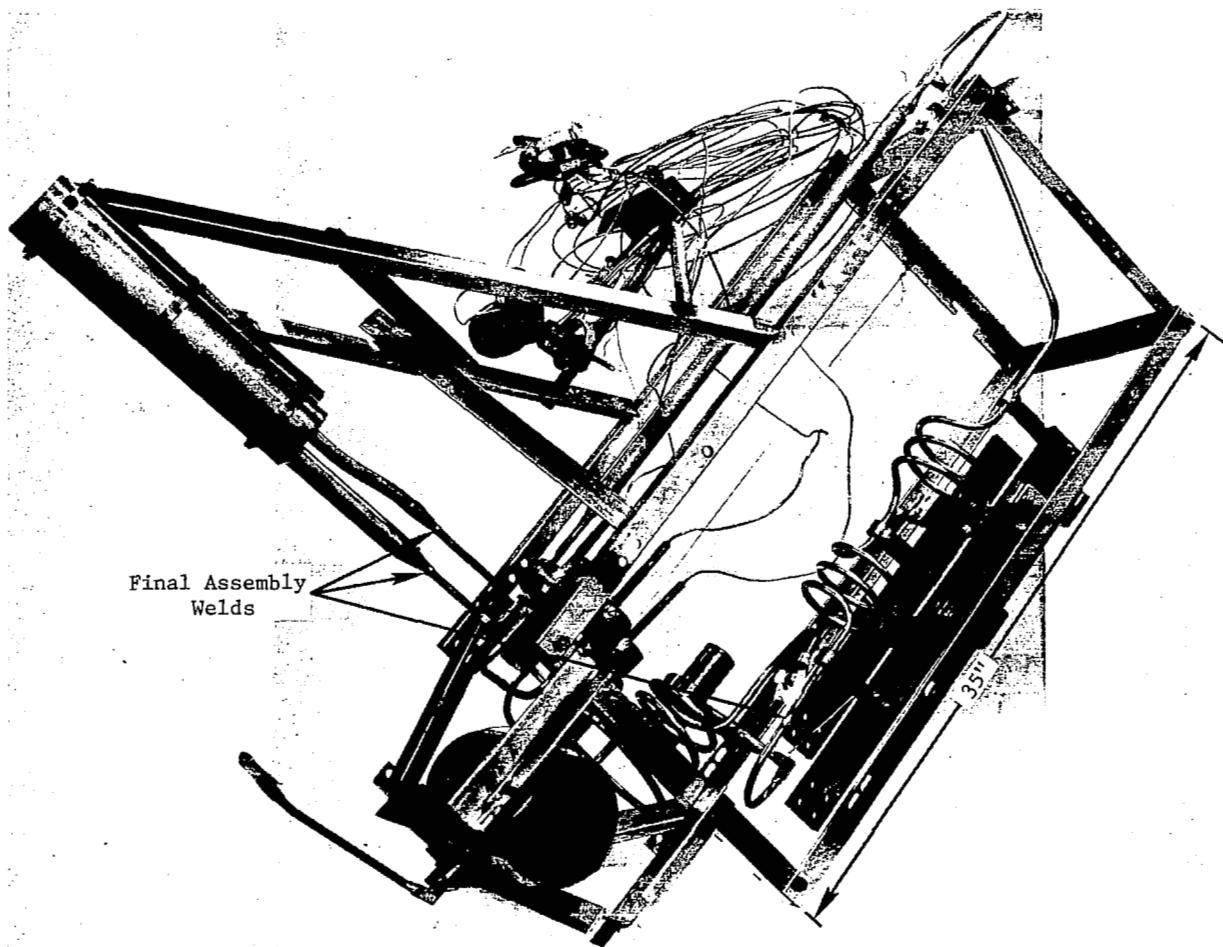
High Temperature Alkali Metal Valve Test Loop in Support Structure Used for Final Assembly in the 8 Foot Diameter Extension to the Weld Chamber. (C68031814)
